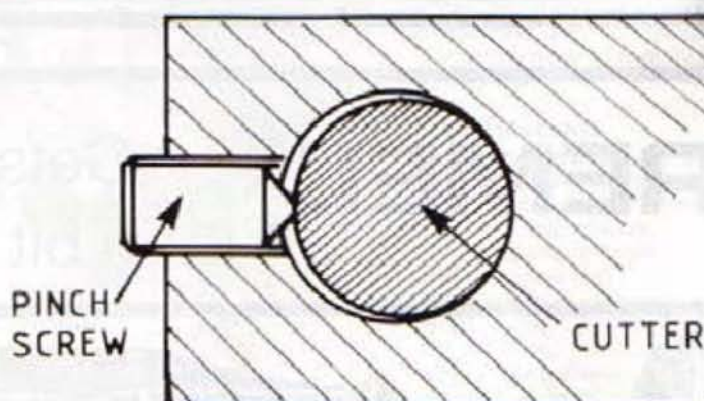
PINCH SCREW FORCES THE CUTTER ONTO THE BACK FACE OF THE HOLE. THERE WILL BE A SMALL CLEARANCE AT THE SCREW SIDE OF THE HOLE.
